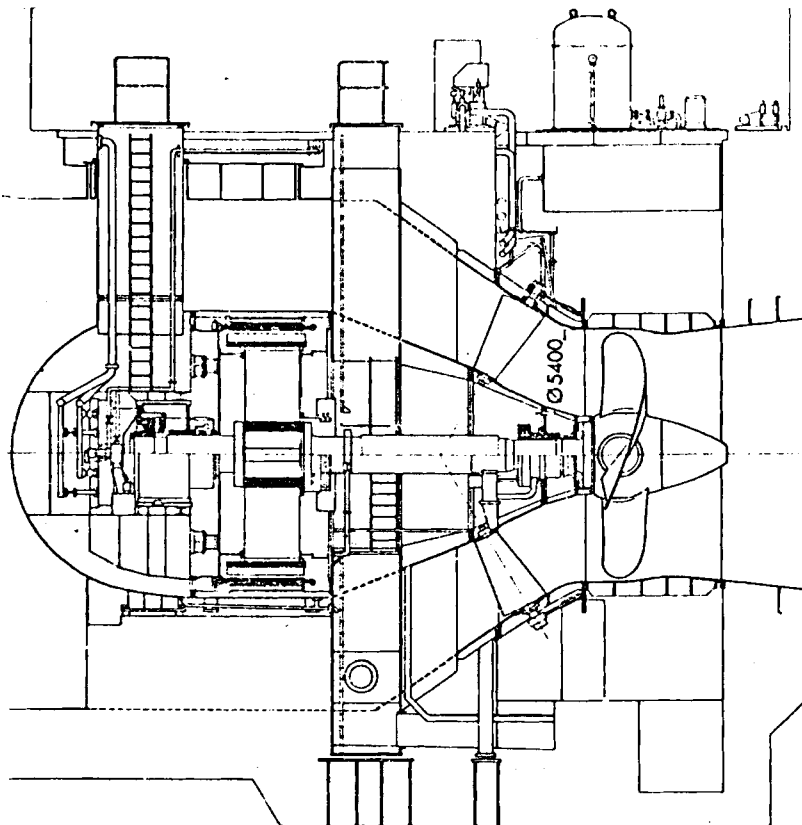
Longitudinal section of horizontal shaft bulb turbine, plant Anjala, Finland. $H = 11$ m; $n = 100$ rpm; $P = 22,7$ MW, built by Tampella works, Finland. (Drawing courtesy Tampella, Tampere, Finland)
